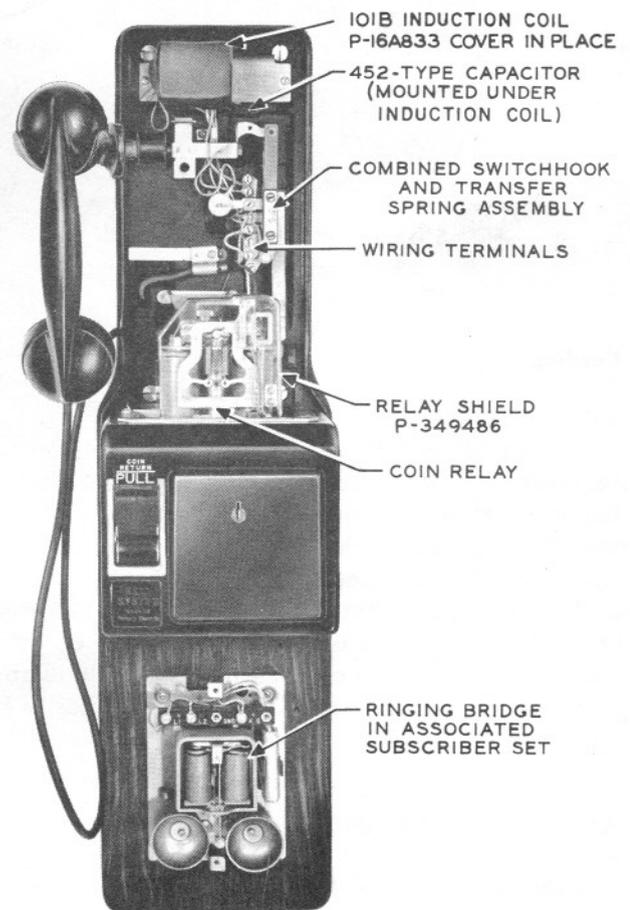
Combined Assembly with Induction Coil and Capacitor
